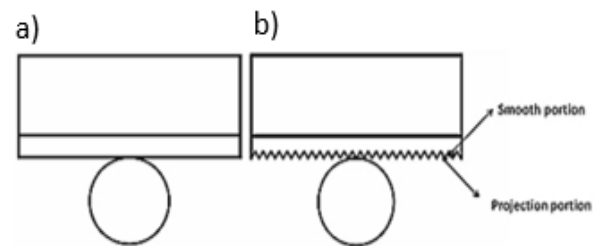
(a) Cutting by the smooth-edged blade; (b) cutting by the serrated blade.
